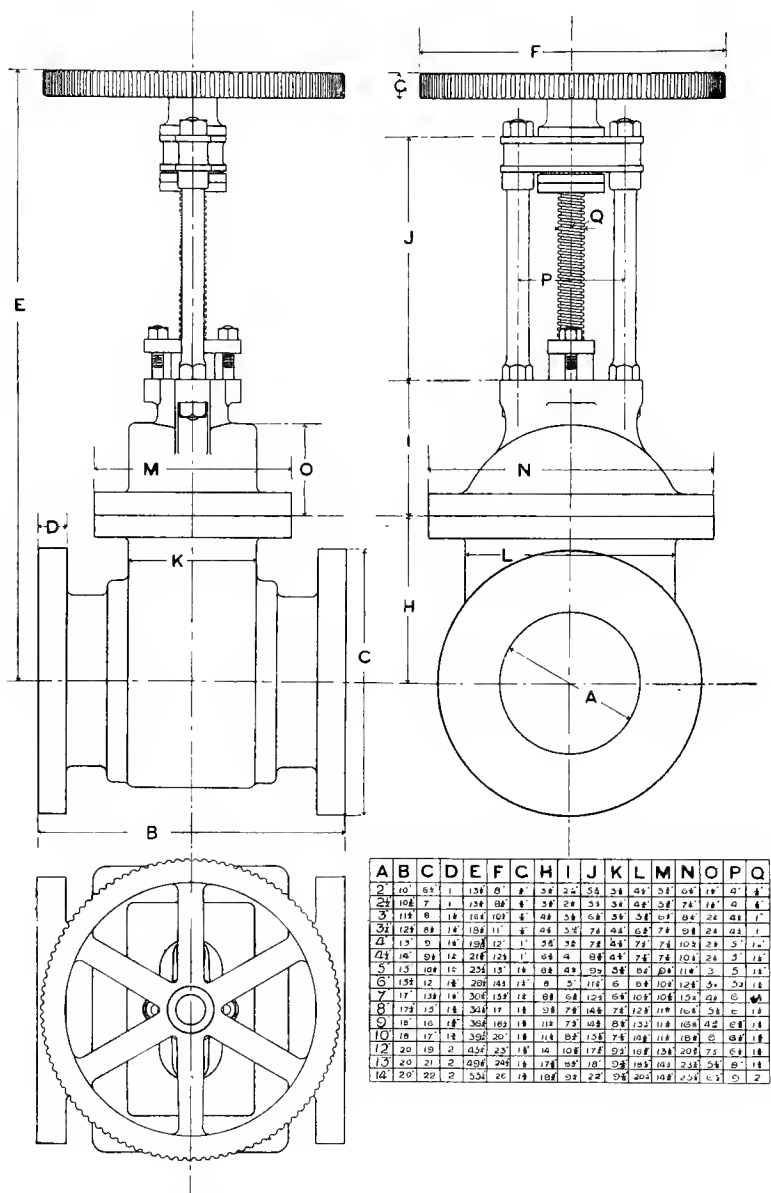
"FULLWAY" VALVE WITH GENERAL DIMENSIONS (TABLE XXI).
